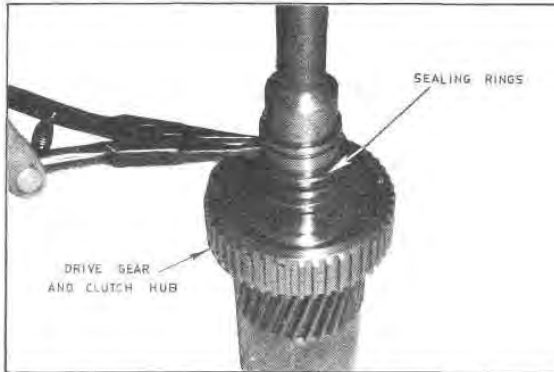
Installing the Forward Clutch Sealing Rings on the Drive Gear
